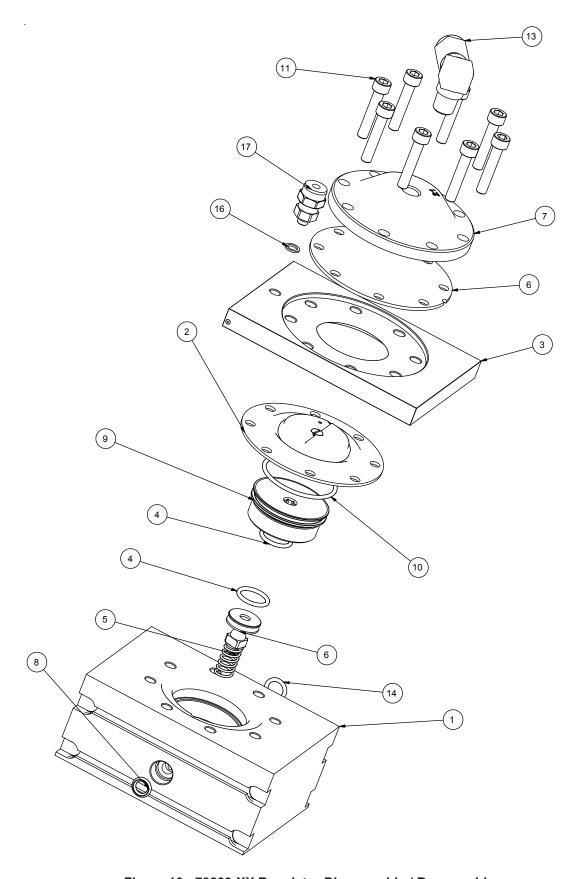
79239-XX Regulator Disassembly / Reassembly
